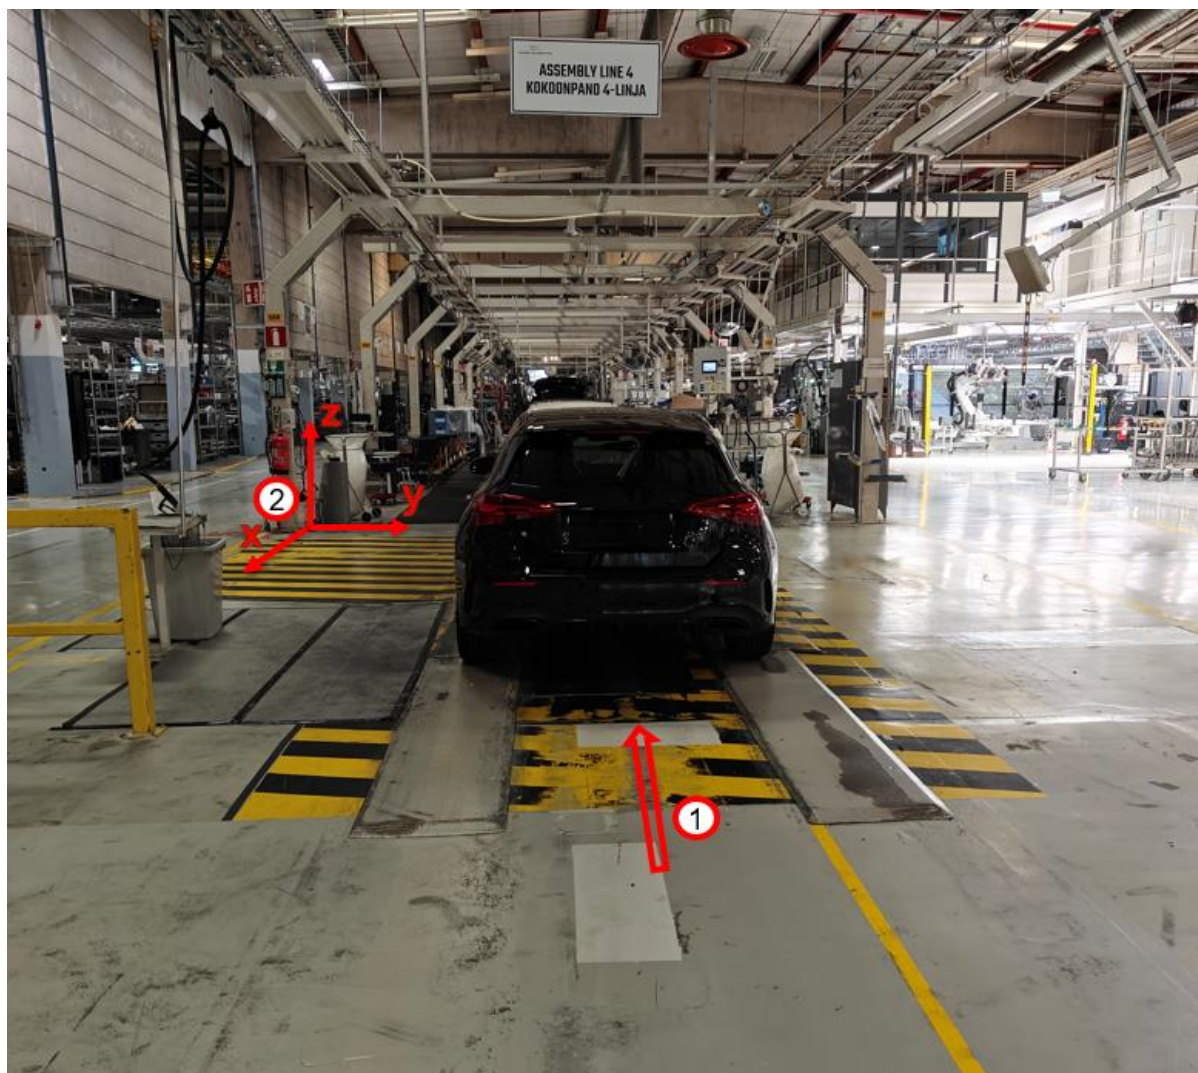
The start of assembly line 4, where the machine vision system could be implemented. Circle 1 indicates the direction of vehicle movement on the conveyor, and circle 2 indicates the axis along which system specification data is defined. From: the author (2026).
